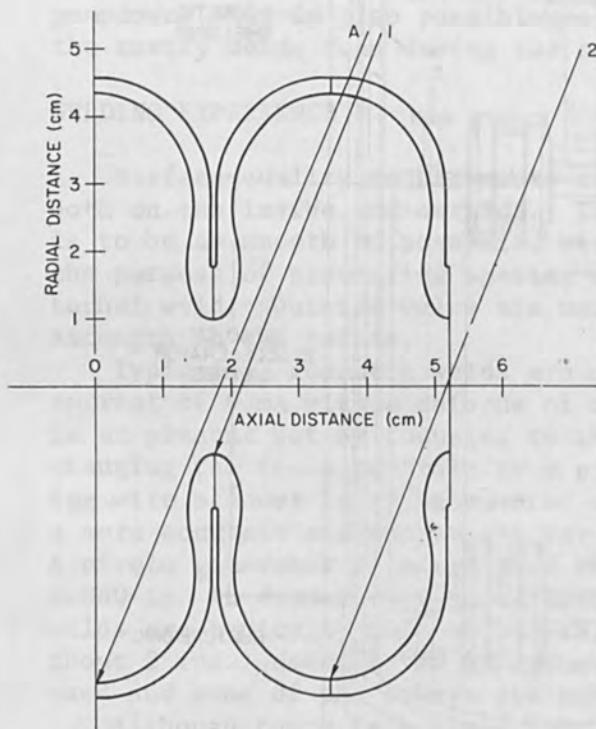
Section of assembled structure. Lines 1 and 2 are successive beam paths to weld the structure from half-cavity shells. Line A is the path required if the structure is to be assembled from full cavity sections.
